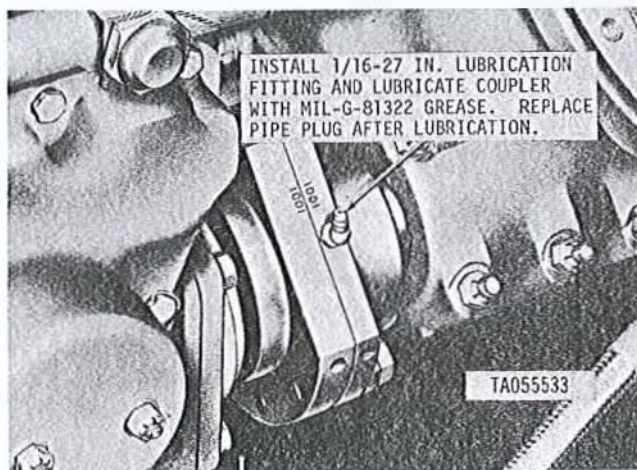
Fuel injection pump drive coupling with lubrication fitting installed.
